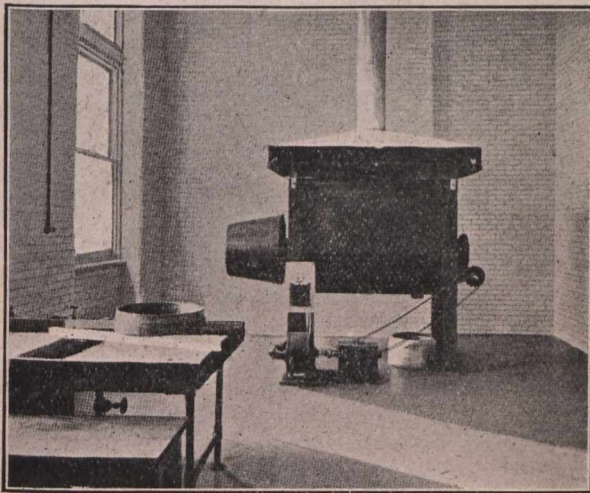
Rotary blank-annealing furnace and sawdust-drying plate.
